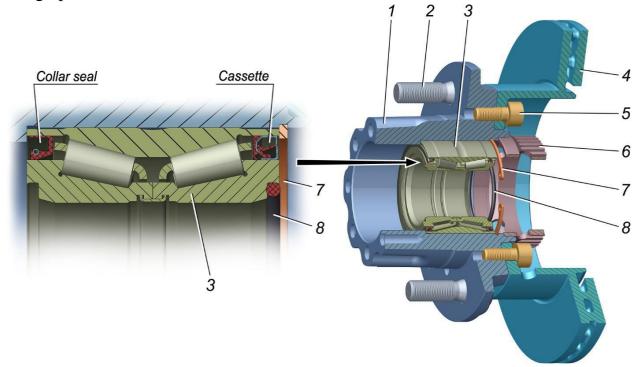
Rear wheel hub with brake disk and bearing: 1 – rear wheel hub; 2 – wheel hub bolt; 3 – double–row taper roller bearing; 4 – brake disk; 5 – screw; 6 – rear ABS rotor; 7 – retaining ring; 8 – sealing ring.
